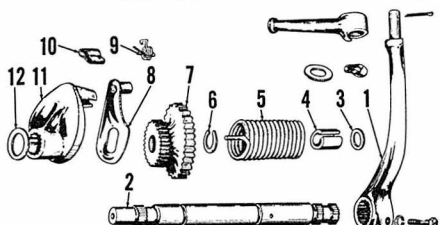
Exploded view of kick starter assembly. Gear (7) meshes with gear (11—Figs. BS2-20 and BS2-21).
